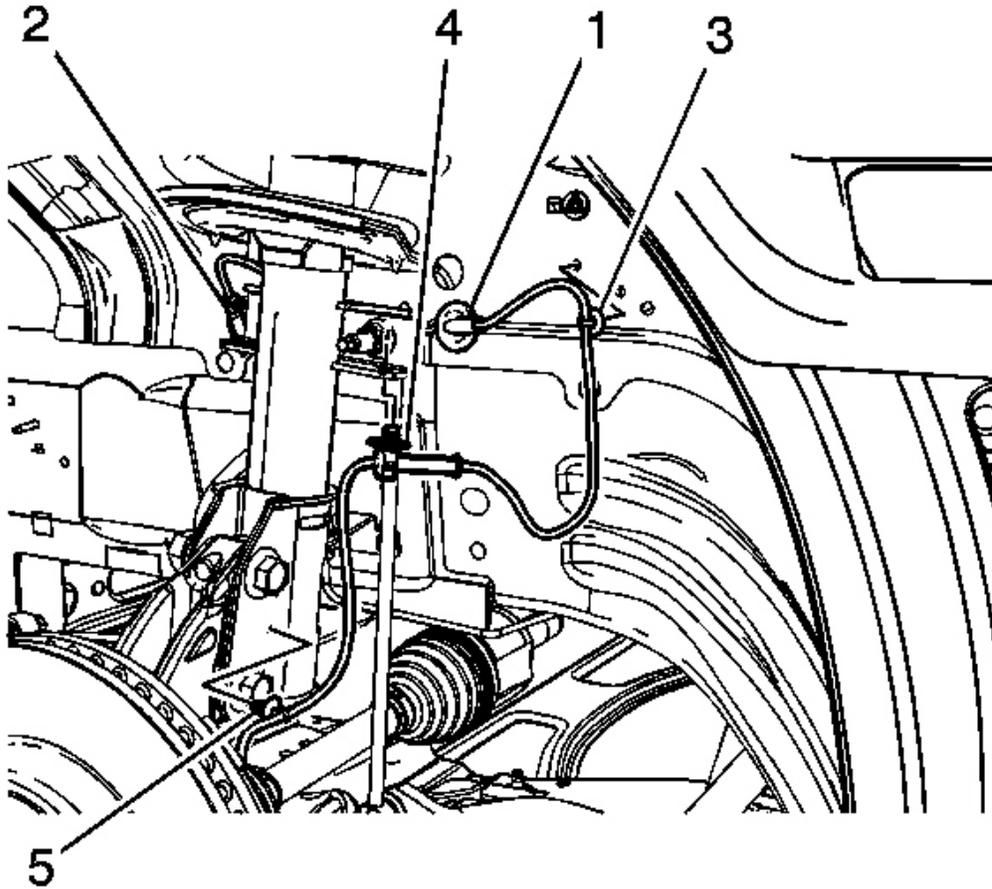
Identifying Wheel Speed Sensor Bolt
